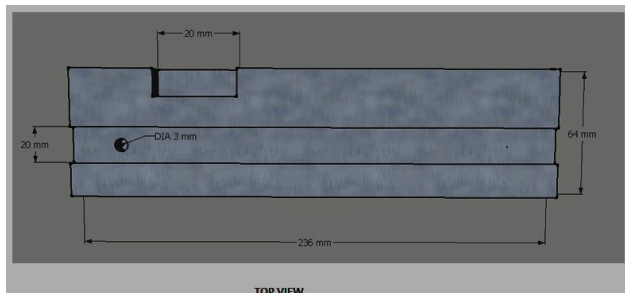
Design of Rail Guide for Pneumatic Stamper
